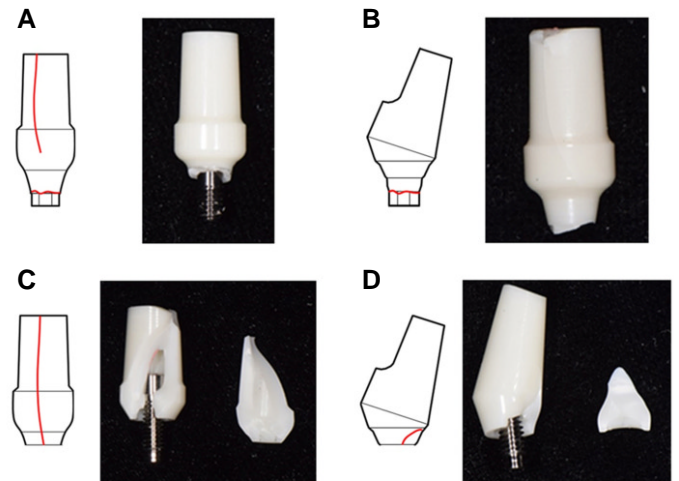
Fracture modes of zirconia abutments. (A) Internal hex and vertical fracture of INS specimen, (B) Internal hex fracture of INA specimen, (C) Vertical fracture of EXS specimen, (D) Cervical fracture of EXA specimen.
